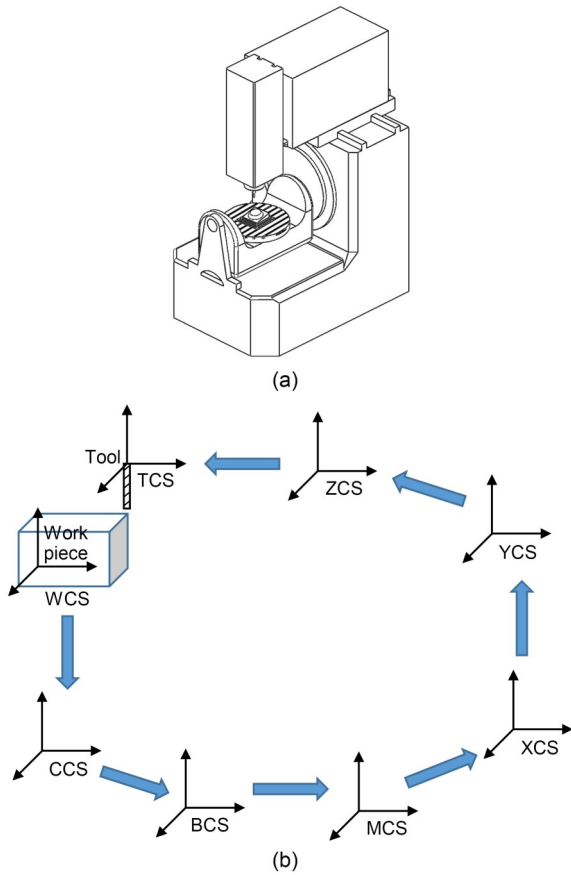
Typical BC-type five-axis machine tool with dual rotary tables: (a) schematic diagram; (b) kinematic chain structure
